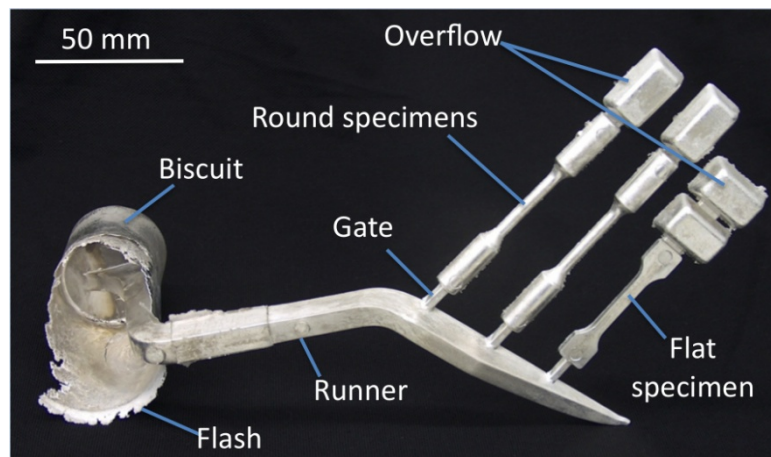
A HPDC casting showing two round and one flat tensile sample. [45].
